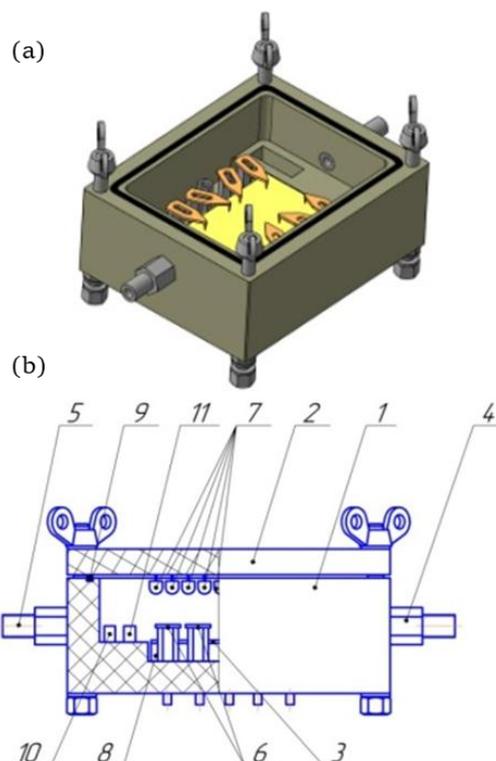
Model of measurement cell for the characterization of gas sensors (a) and its scheme (b): housing (1), cover (2), common contact (3), gas inlet connection (4), gas outlet connection (5), clamping contacts (6), LEDs (7), heater (8), sealing (9), humidity-temperature sensor (10), pressure sensor (11).
